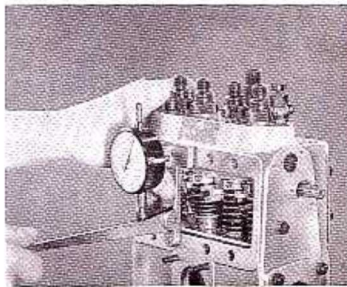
CHECKING HEAD CLEARANCE USING GAUGE 7144/166
